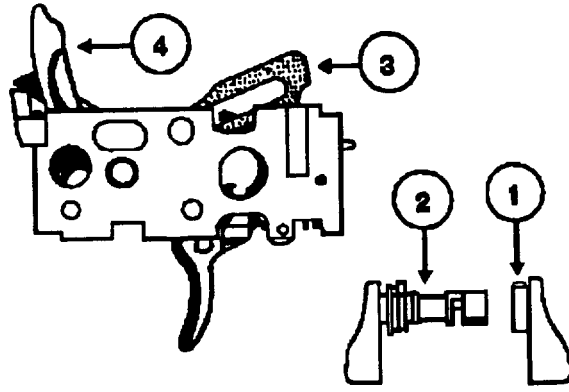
Disassembled Trigger Mechanism And Selector Lever
